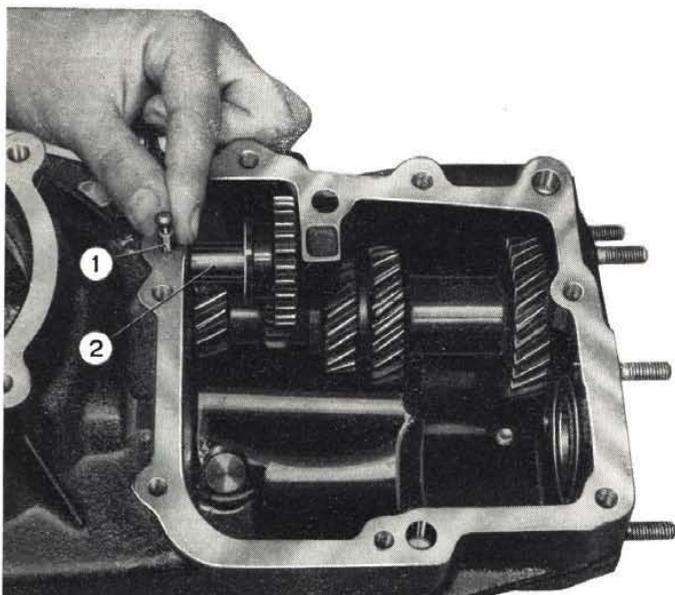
Fitting the reverse shaft and gear lock pin.
